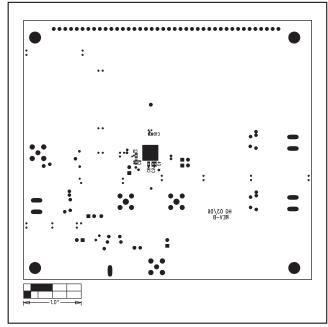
MAX5886/MAX5887/MAX5888 EV Kit Component Placement Guide—Solder Side
